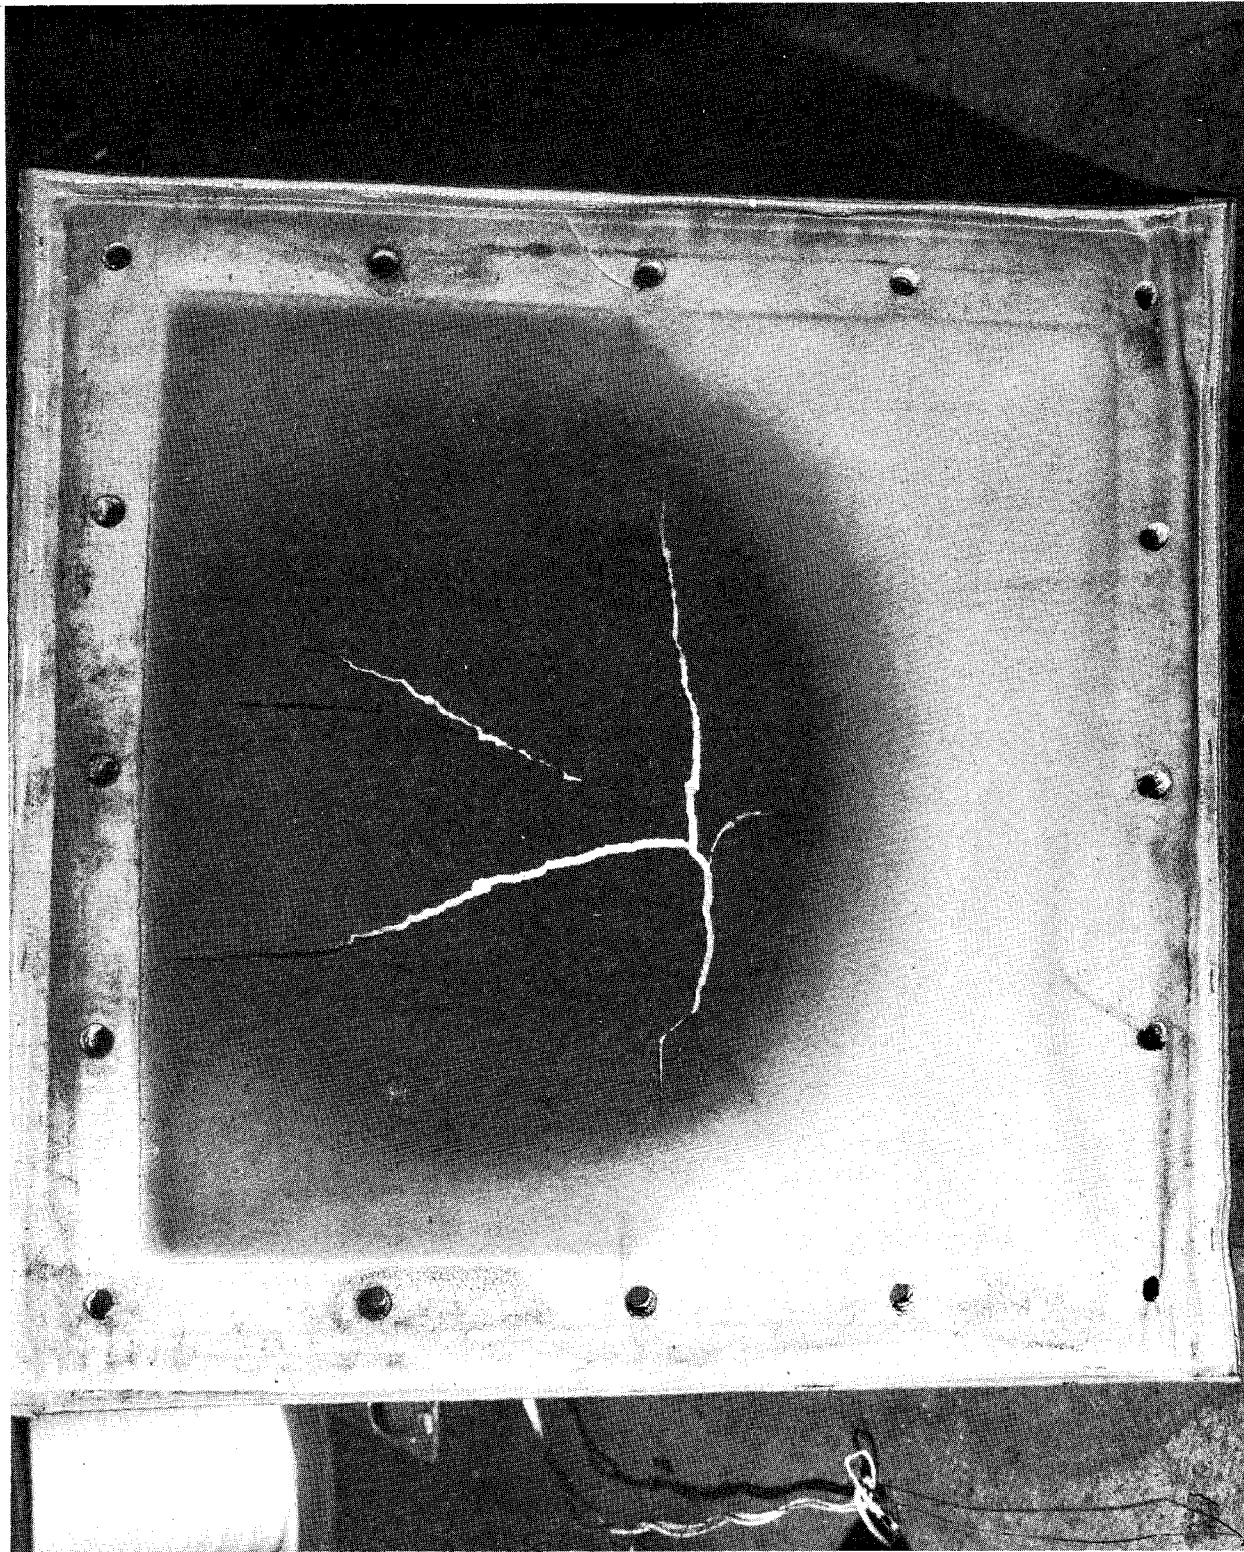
PANEL NO. 3 - FLEXIBLE CLOSURE CANOPY - REAR
